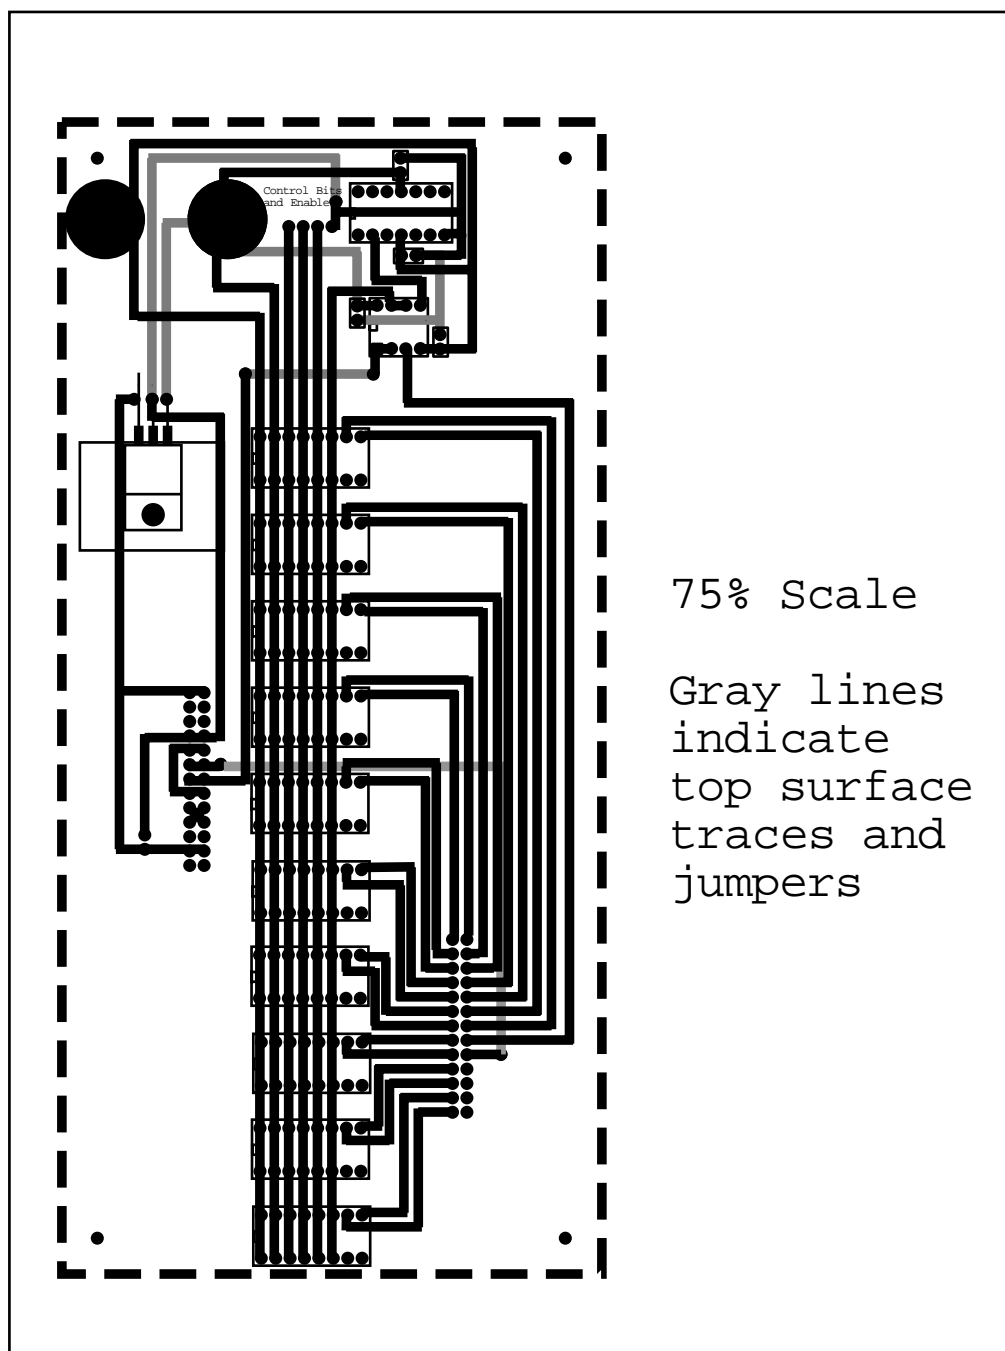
The circuit board layout for the MOT magnet main controller board.
